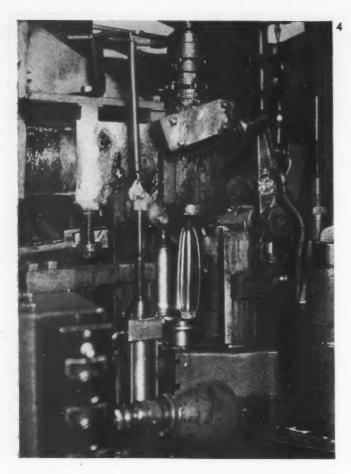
is a close-up of the extrusion head and one split blow mold. This photograph shows the formation of a bubble for the production of a large bottle. The bubble, which has been extruded and blown to its present size and shape in the atmosphere, is about to be tightly enclosed in the mold. The blowing will then proceed until the bubble has taken the exact outside contour of the mold. Fitting smoothly at each point, the bubble is formed into a bottle, including even the perfect formation of the neck and outside threads.
